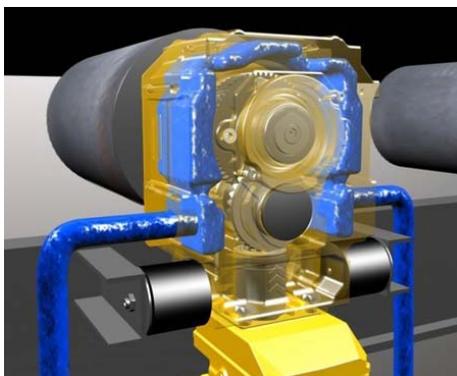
Conveyor line of a continuous casting plant with WATT roller table motors
